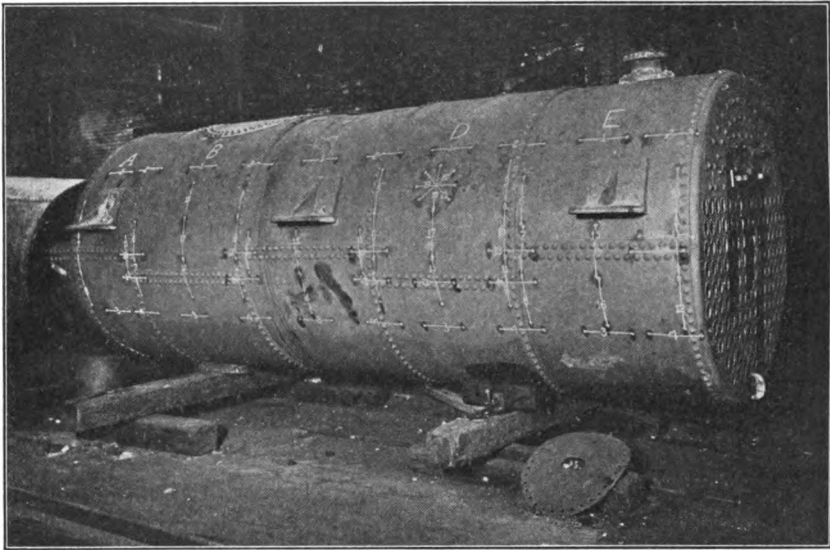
BOILER 4092 PRIOR TO THE TEST. NOTE THE 10-INCH GAGED LENGTHS.
